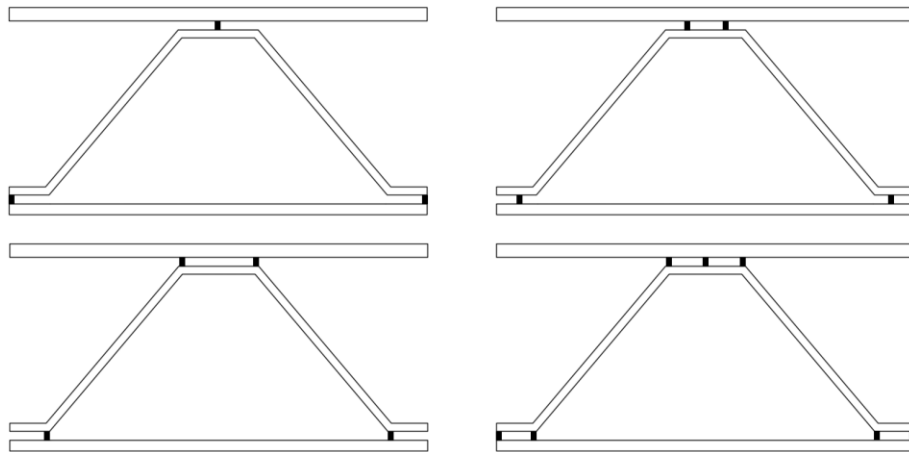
Different weld configurations with one weld in the centre (top left), two welds in between the corners and centre (top right), two welds in the corner (bottom left) and welds in both corners and centre (bottom right).
